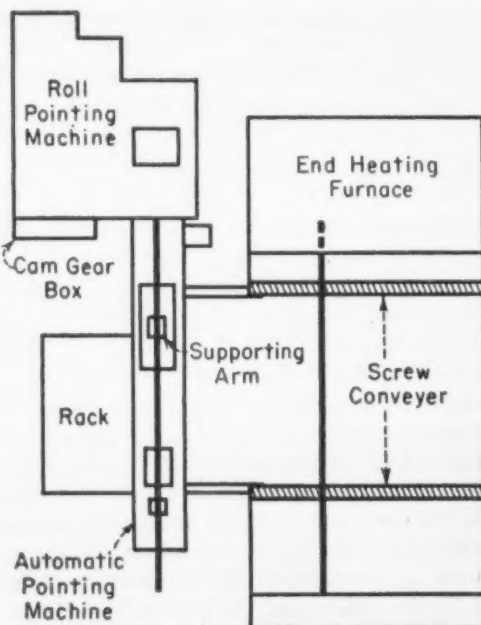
Plan view of automatic end pointing setup used at Chrysler in front spring production.
